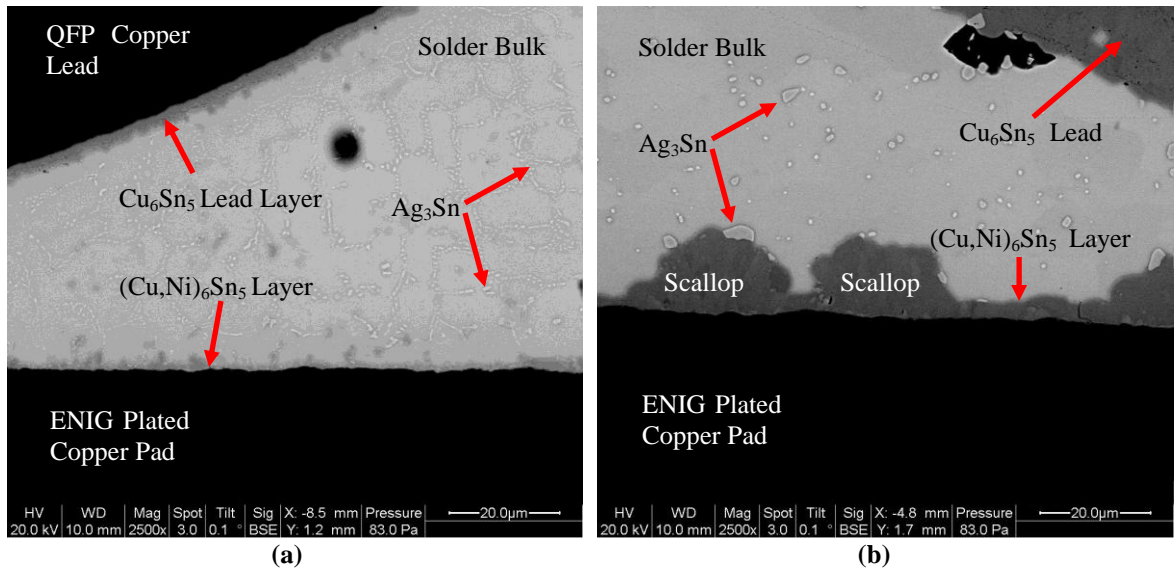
SAC305 QFP solder joints, (a) after reflow, (b) after 1000 hours of aging at 185°C (courtesy CALCE).
